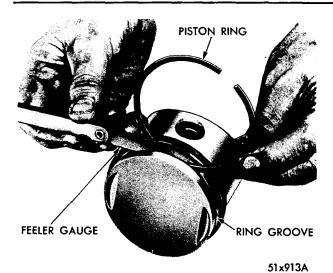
Checking Piston Ring Side Clearance (Typical)
